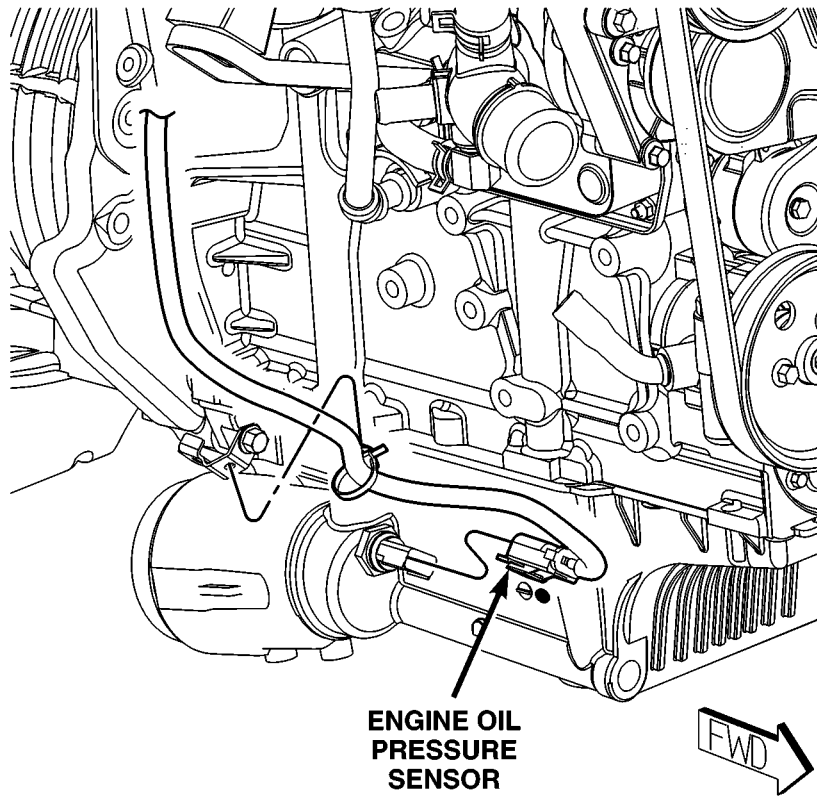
LOWER RIGHT FRONT DIESEL ENGINE
